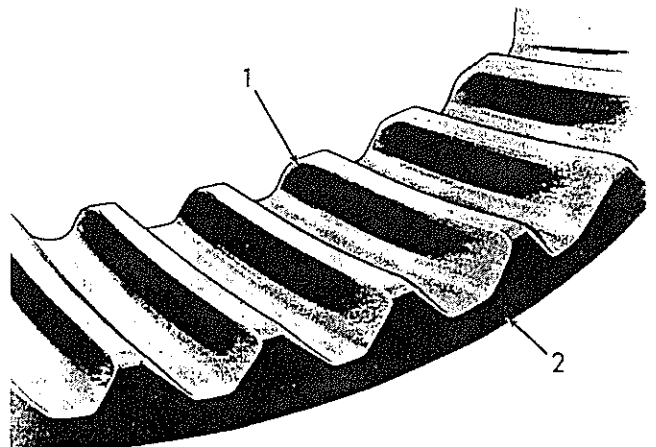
Satisfactory Tooth Contact - Gears Loaded (T-31449)
